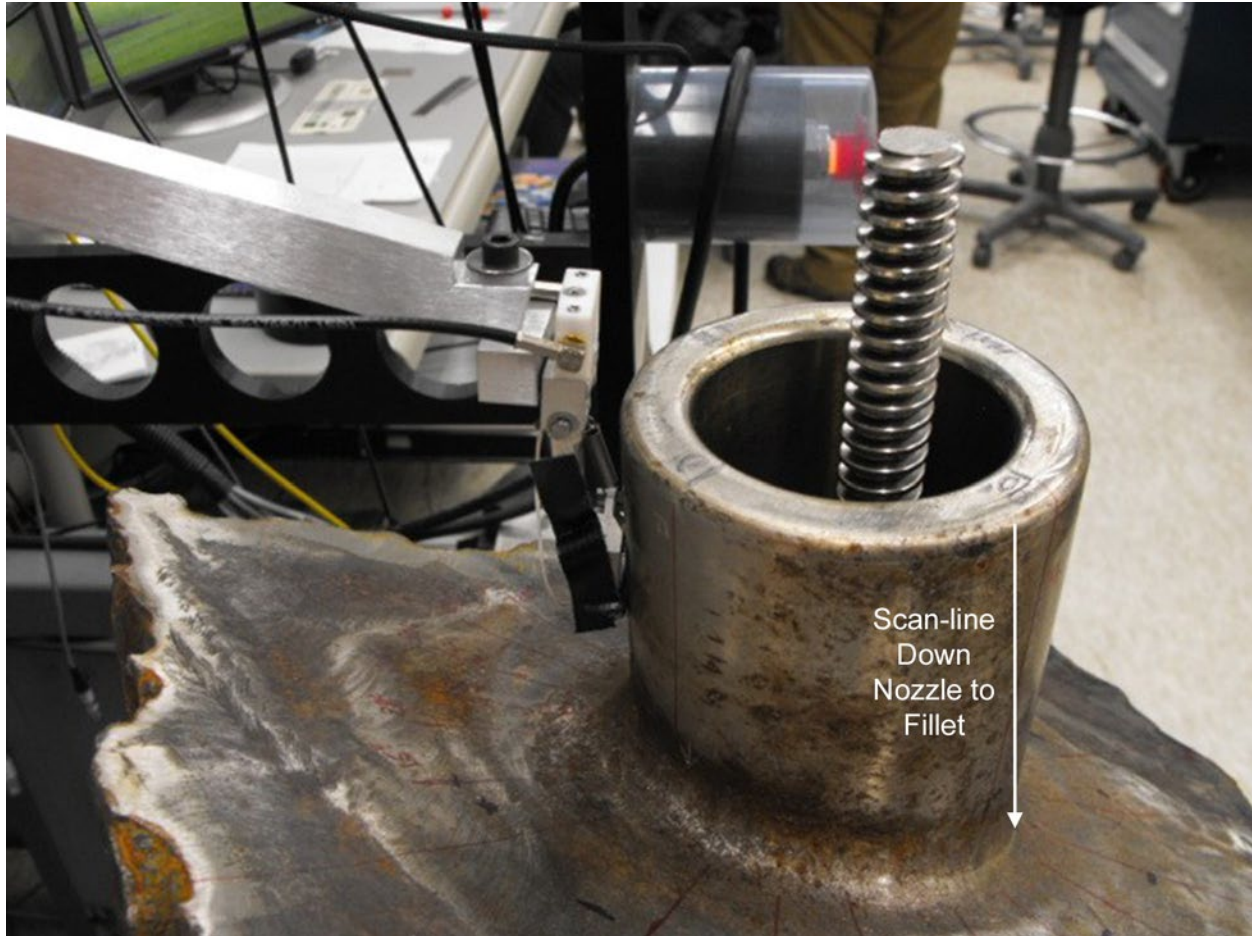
CRDM Sample #9 Examination of J-groove Fillet Weld and Portions of the CRDM Nozzle OD
